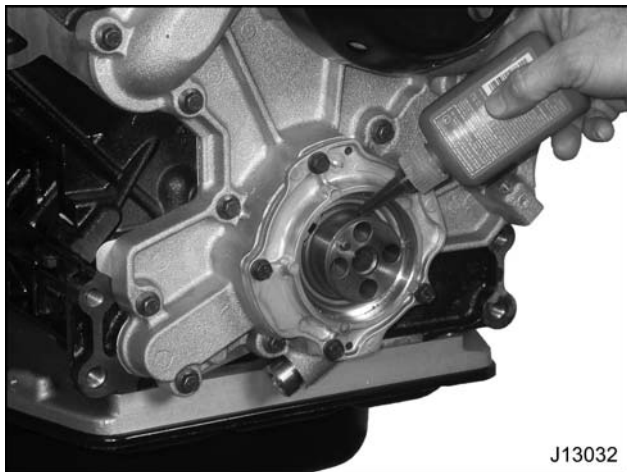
Loctite® Hydraulic Sealant application to crankshaft
